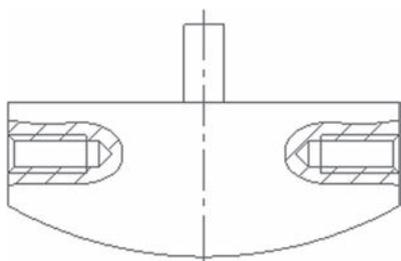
Schematic of ship-shaped collet of the upper frictional part
